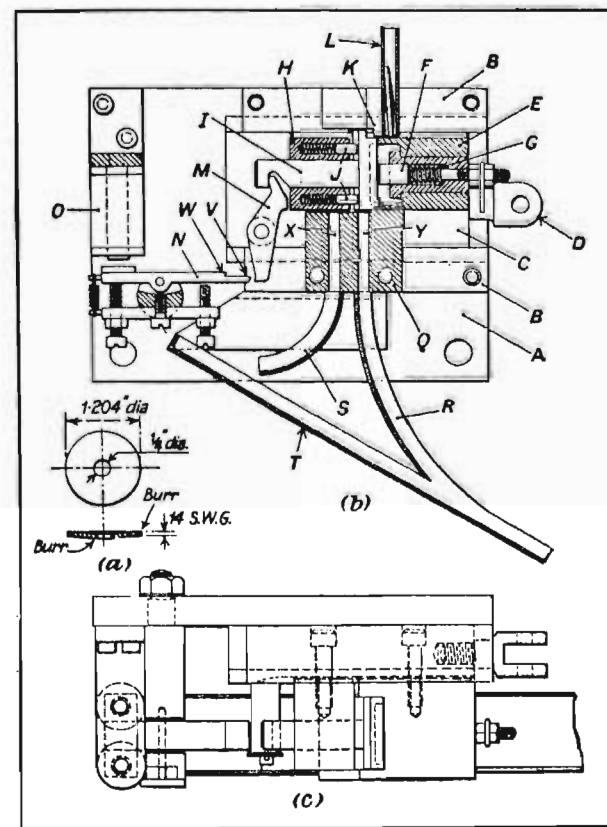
(a) Views of Blank, Showing Distortion and Location of Burrs. (b) Sectional Side View of Selecting Device. (c) Plan View, with Chute *L* and Stop *K* Removed.
